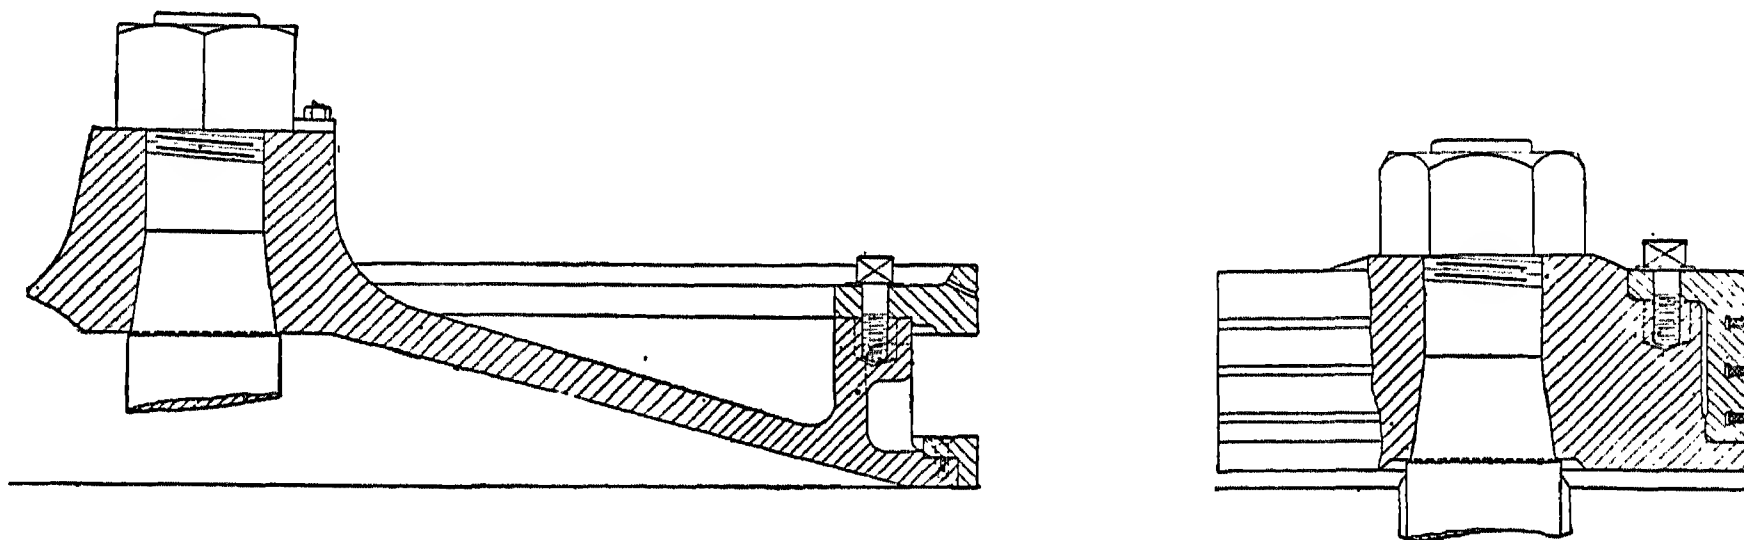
Typical Piston Packing Rings and Methods of Fastening in Marine Practice
